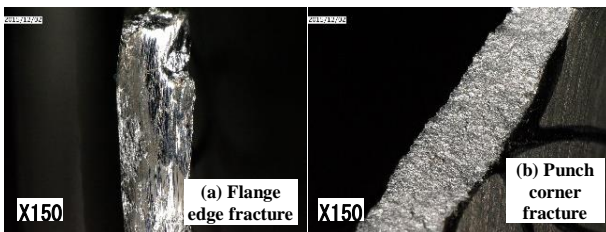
Fracture surface photos (flange fracture (a) and corner fracture (b))
